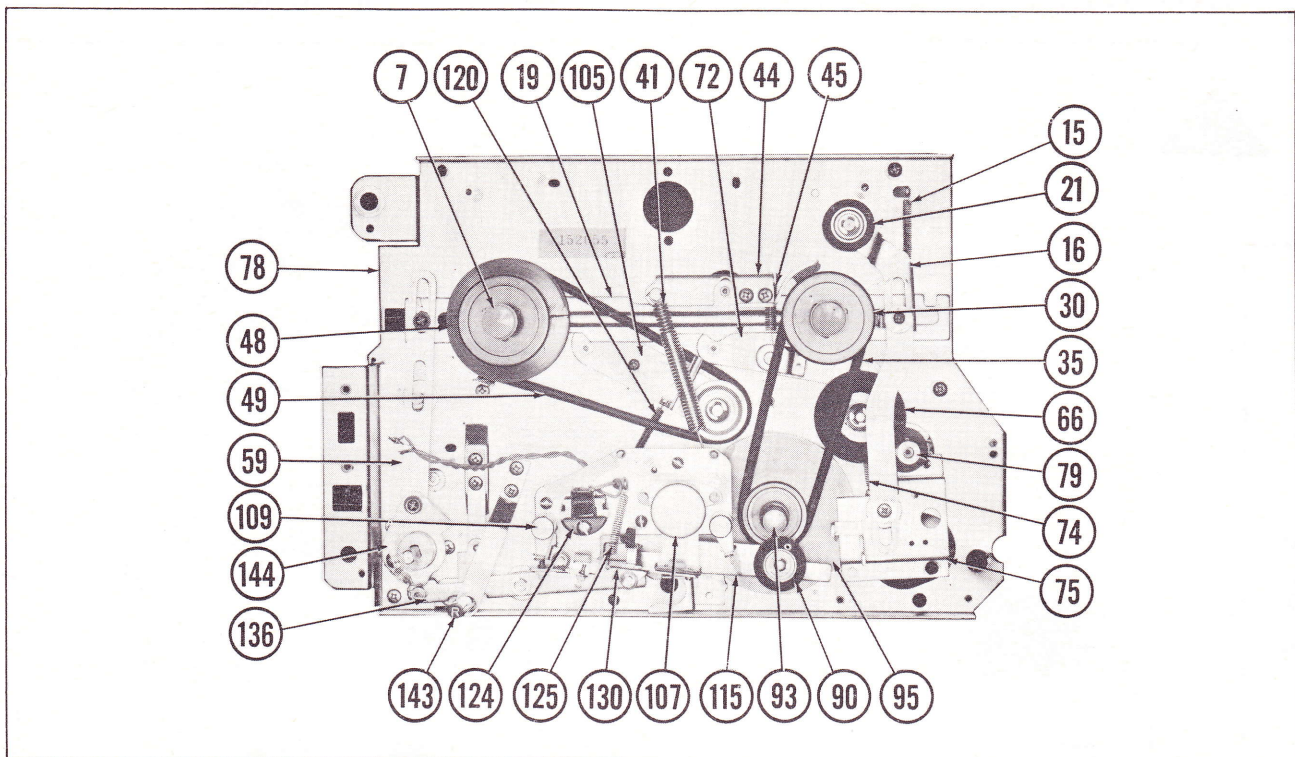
TOP VIEW OF MECHANISM WITH DRESS PLATE REMOVED
